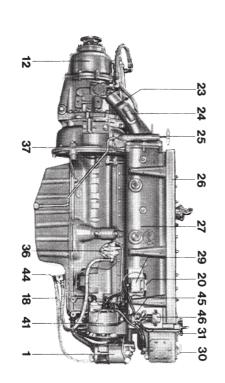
Starboard side, MD 32 A with Borg-Warner reverse gear Pos. No., see page 2
